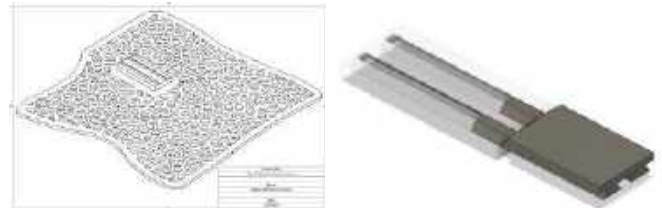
Mount on flexible, 3D printed wrist brace (left) and proposed dovetail attachment mechanism (right).
